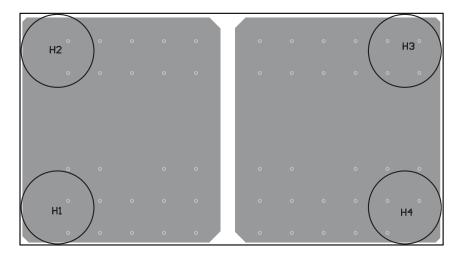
ISO6521REUEVM PCB Layout - Composite Bottom View
